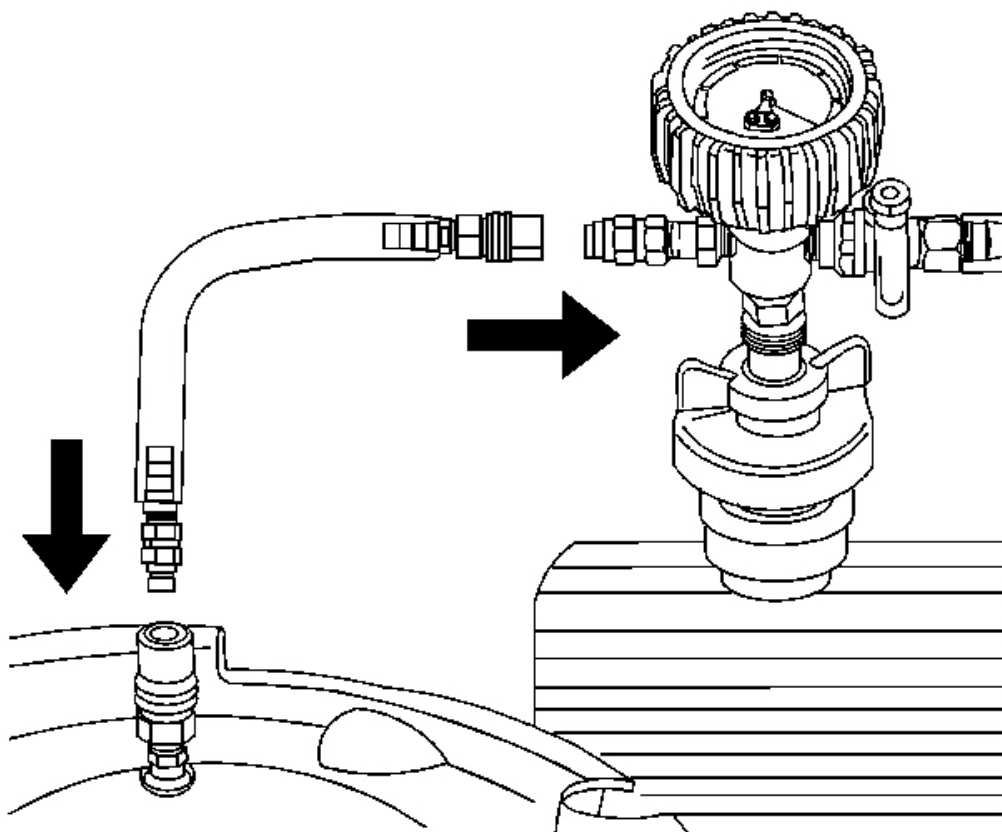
Attaching Vacuum Hose To Vacuum Gauge Assembly & Vacuum Tank
